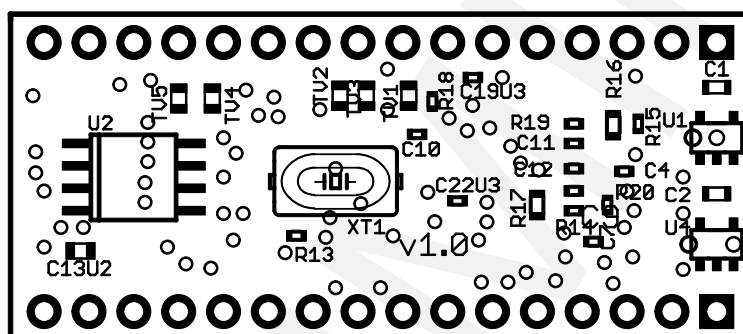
Bottom layer and silkscreen of the PCB (Bottom view)
